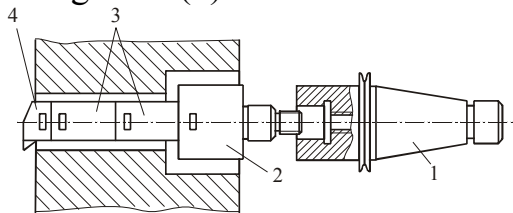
Designs of modules couplings: (1) cutting tool; (2) holder
